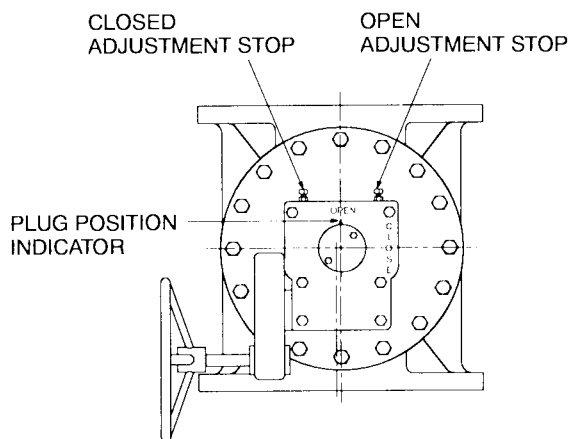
GEAR ACTUATOR ADJUSTMENT
